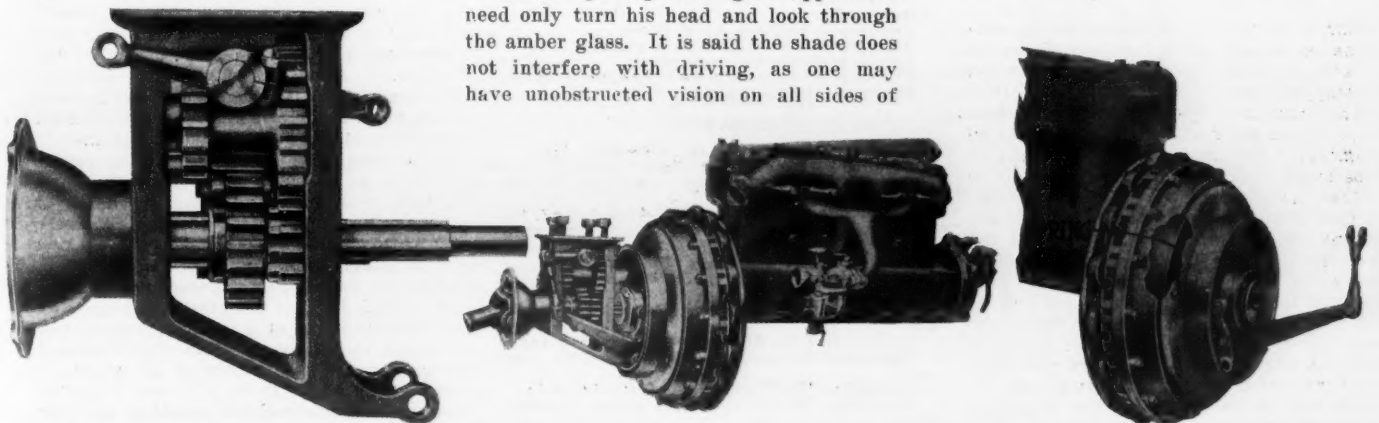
GARDNER COMBINATION ENGINE CRANKER AND TWO-SPEED SELECTIVE GEARSET FOR FORD CARS
